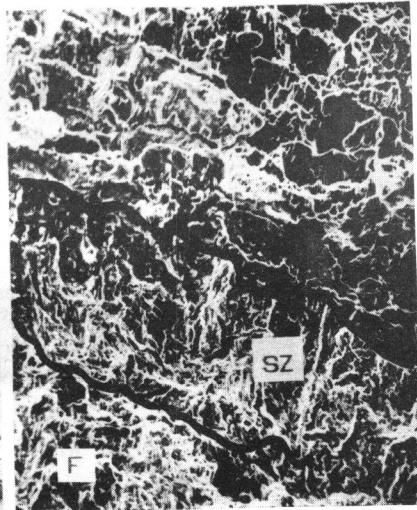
Stretch zone width in overmatched weldment OM-6.
